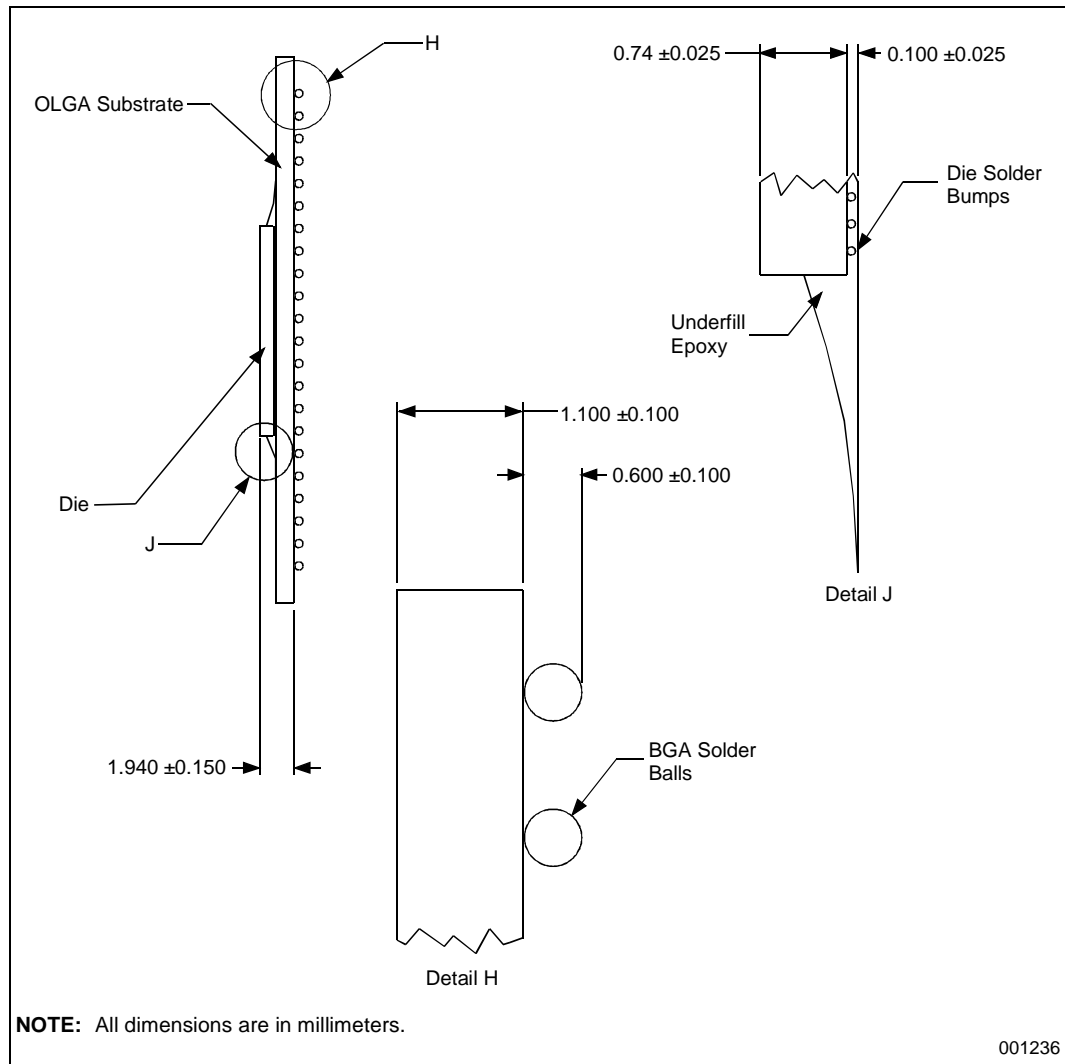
567-Ball (DMH) OLGA1 Solder Balls Detail
